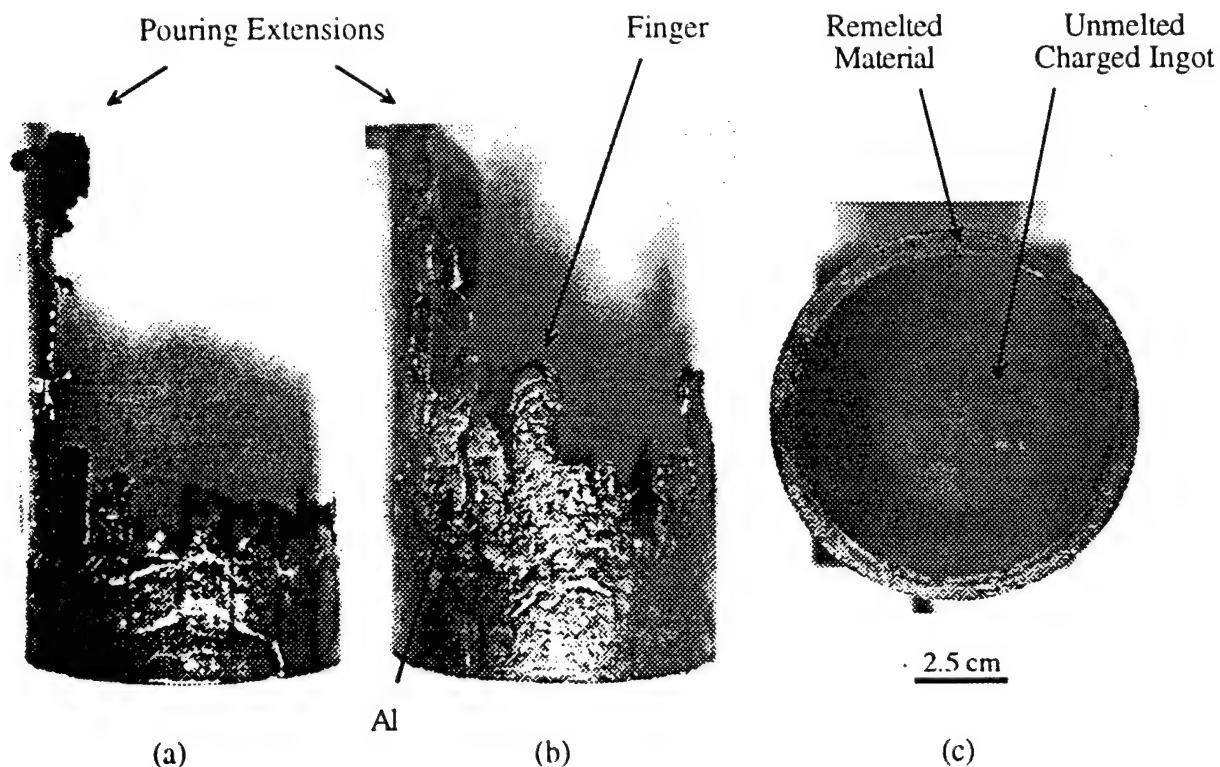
Side views of Ti-48.9Al-2Cr-2Nb skulls formed after 3 minute molten holds in a) Argon and b) vacuum; c) a bottom view of a skull formed after a 3 minute molten hold in vacuum showing unmelted charge. Note the pouring extensions indicated in a) and b) formed as the metal solidified on the crucible wall during tilt pouring. Also note that material solidified on the copper cooling segments resembled fingers and that Al was often visible on the outside surfaces of fingers on vacuum skulls.
